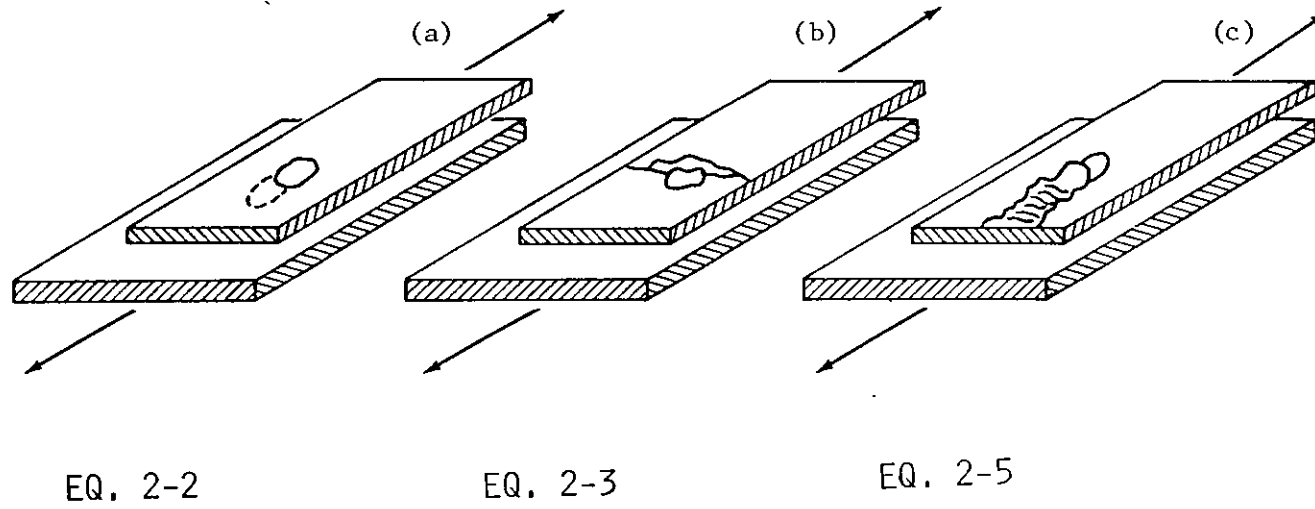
Arc spot weld failure modes. a) weld metal shear; b) sheet tear; c) sheet tear and buckling [18]
